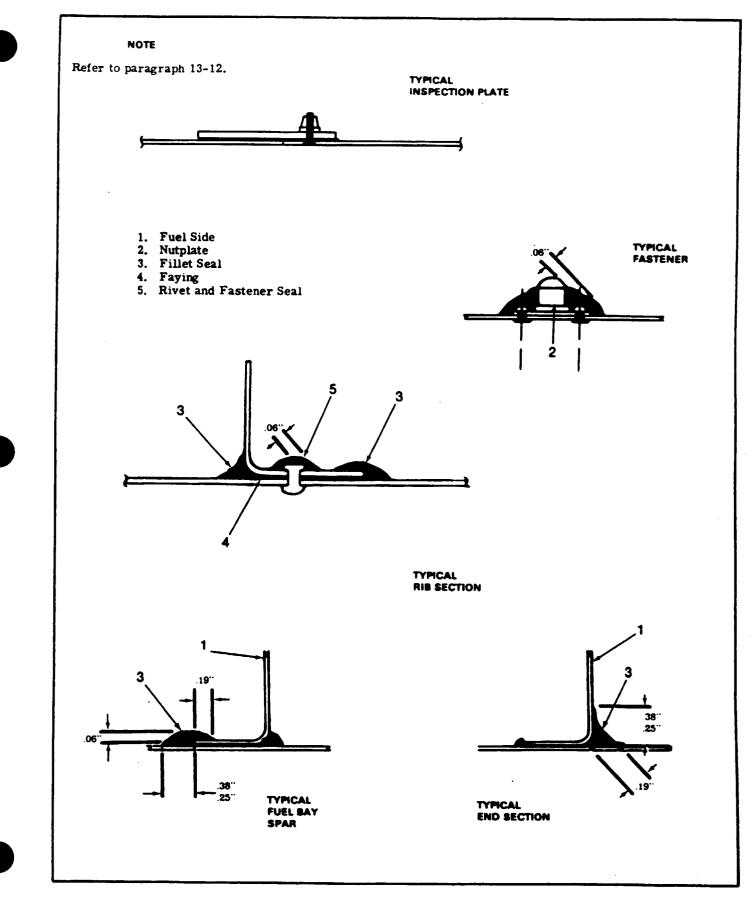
Fuel Bay Sealing (Sheet 2 of 2)
